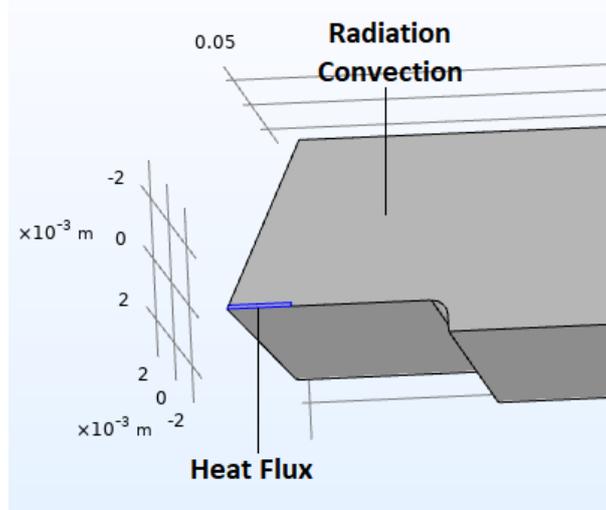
Geometry modeled using SolidWorks imported to the COMSOL software.
